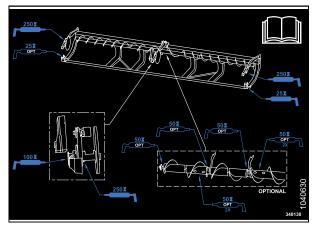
Decal for Double-Knife Header with Three-Piece Upper Cross Auger
